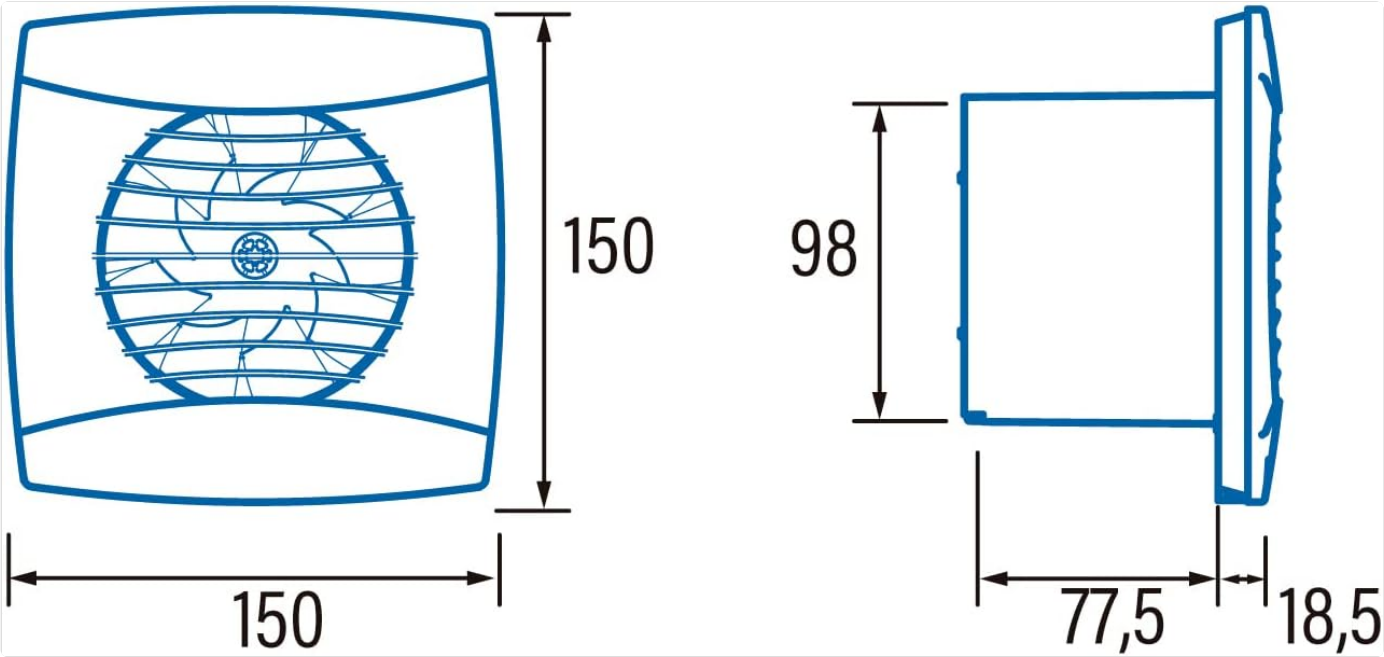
Technical dimensions of the fan, showing a square face of 150mm x 150mm and a depth of 77.5mm for the duct, with an overall depth including the front grille of 18.5mm.
